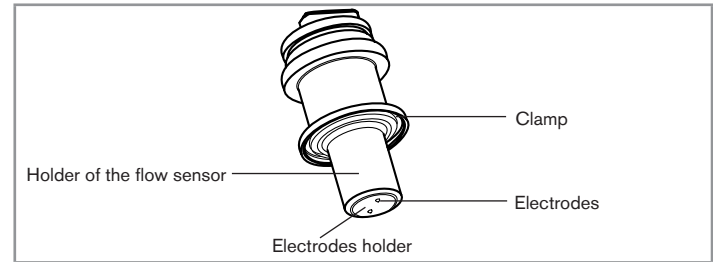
Parts of the flow sensor in stainless steel with a clamp connection
